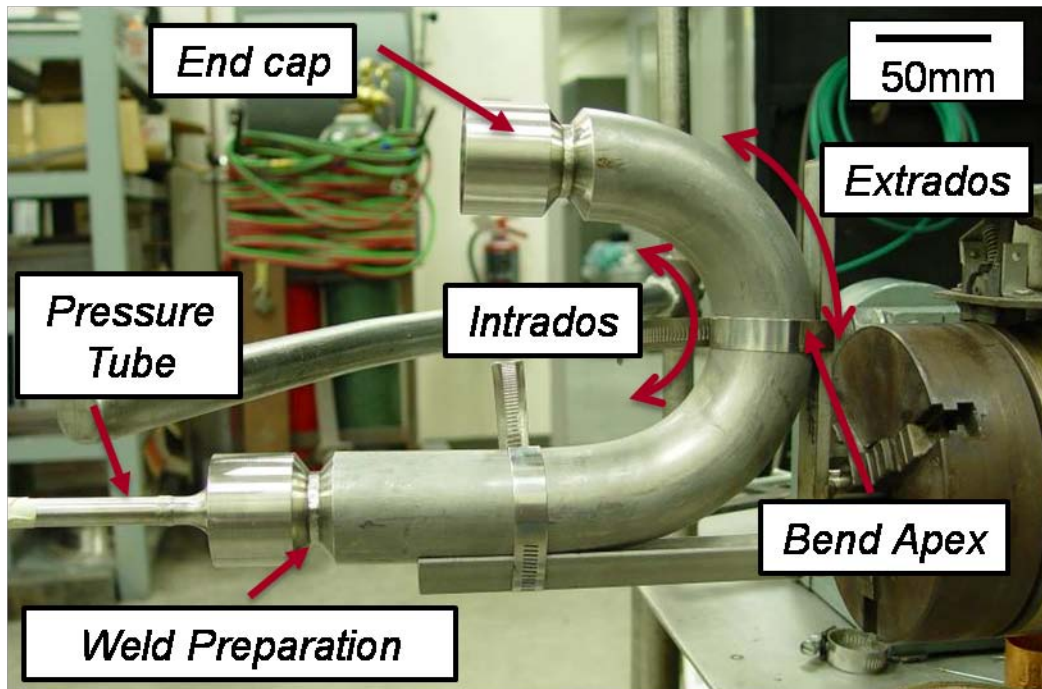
J-bend pressurized creep test specimen (35%OFS sample) during fabrication after partial welding of end caps.
